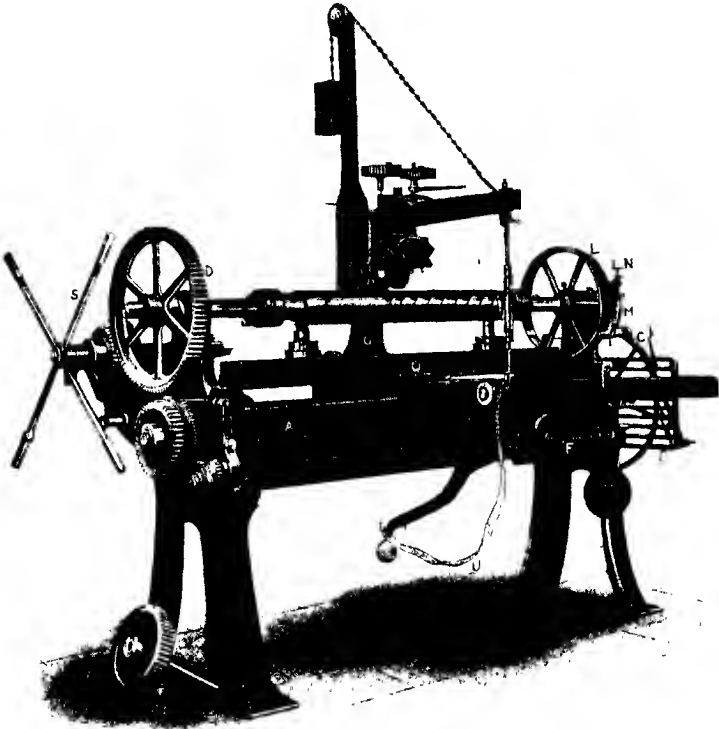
Moulton's Top Pressure Mill Engraving Machine
